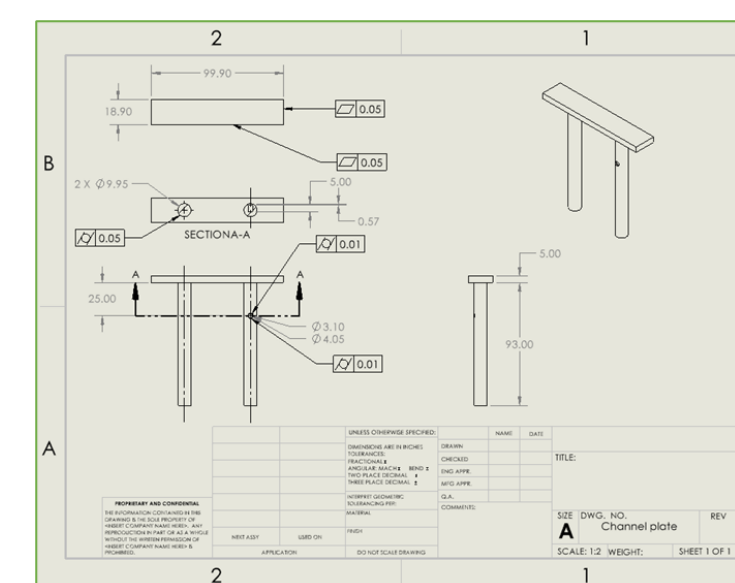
Sample Part Drawing with Dimensioning and Tolerancing
